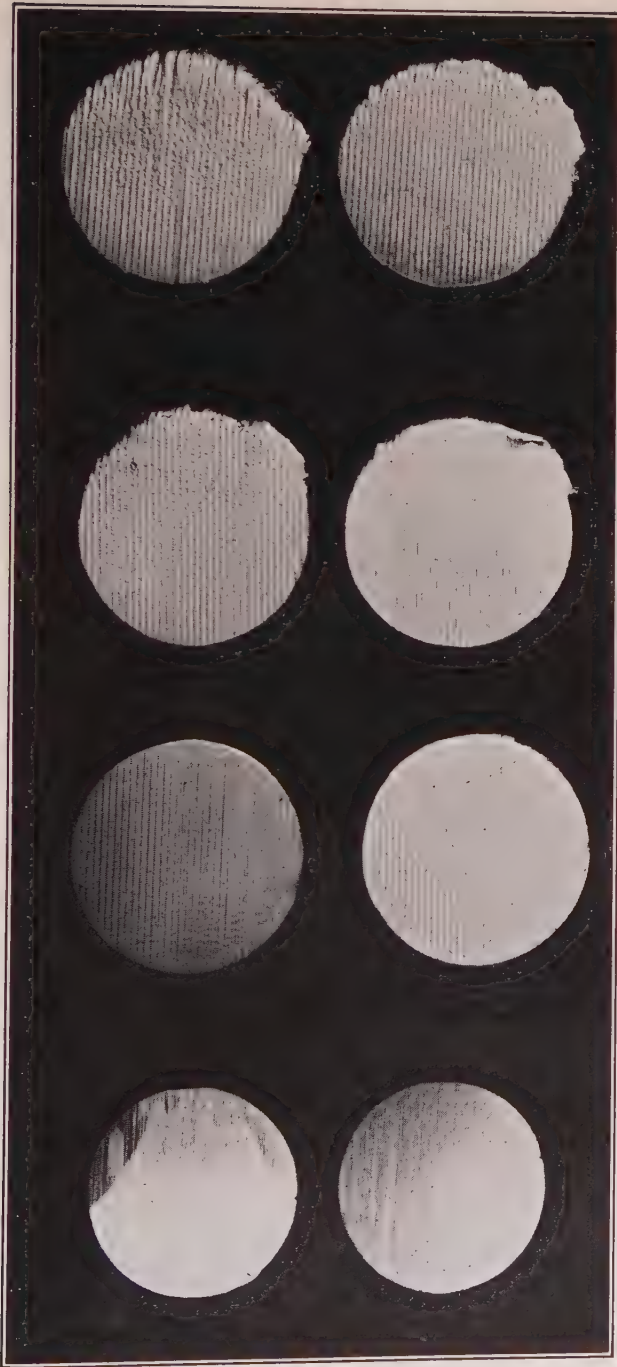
ALUMINUM MACHINED WITH A PLANER TOOL SUCH AS IS USED FOR MACHINING FREE CUTTING BRASS.
